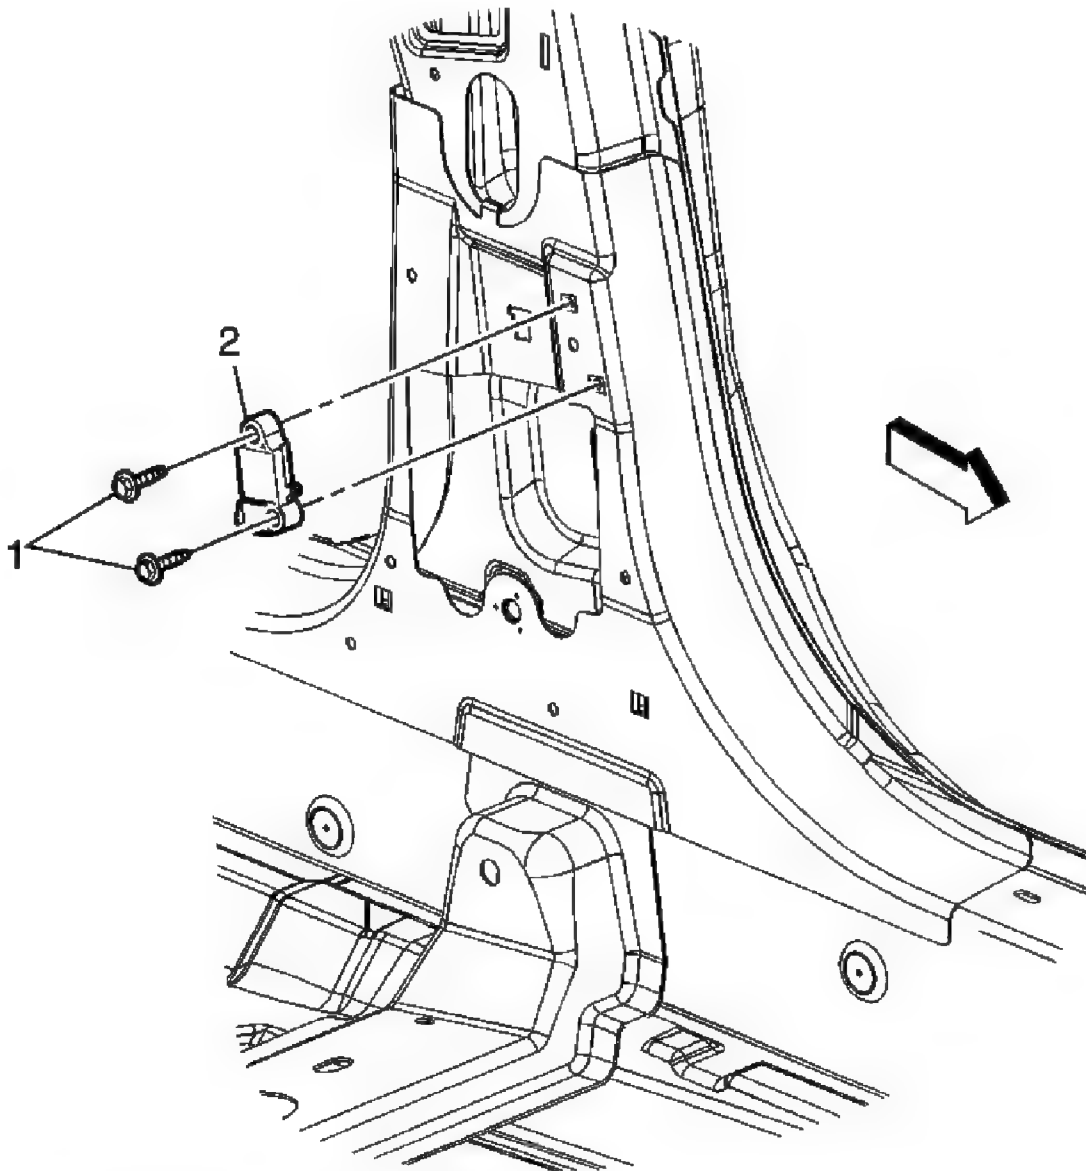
Identifying Inflation Restraint Side Impact Sensor
